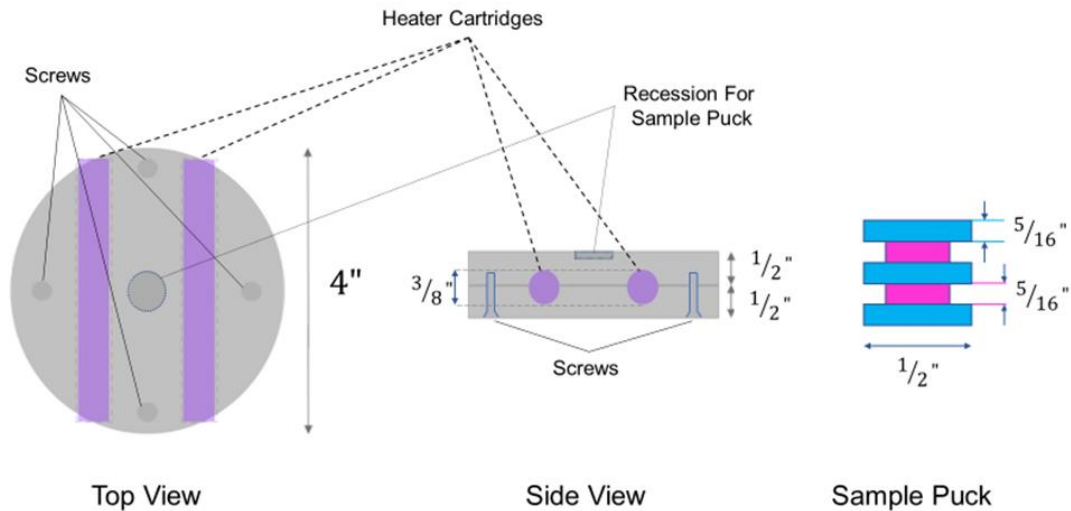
Top and side view of the substrate holder/heater with sample puck design and dimensions.
